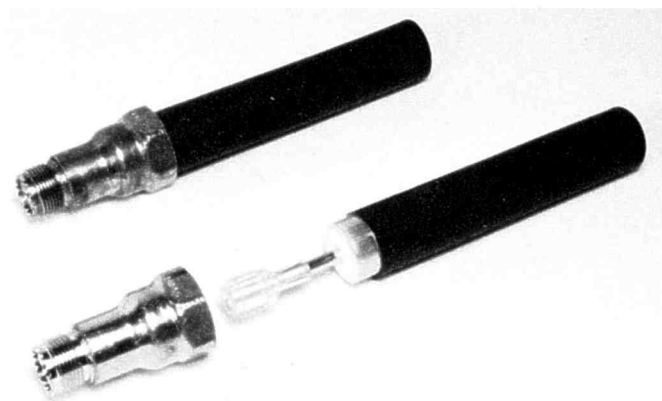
At the bottom, the PL-258 connector is soldered into the plumbing fitting. Half of the barrel's insulator is installed and the barrel center coupler is soldered to the Hardline center conductor. All that's left to do is screw the connector assembly onto the Hardline and weatherproof the connections.
